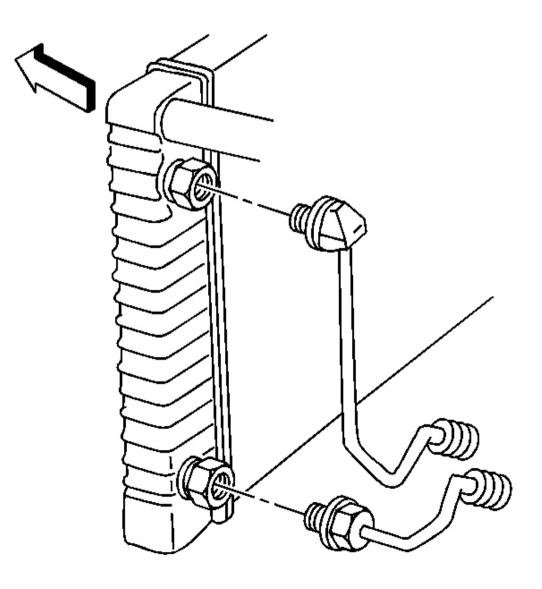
Engine Oil Cooler Line Courtesy of GENERAL MOTORS CORP.
